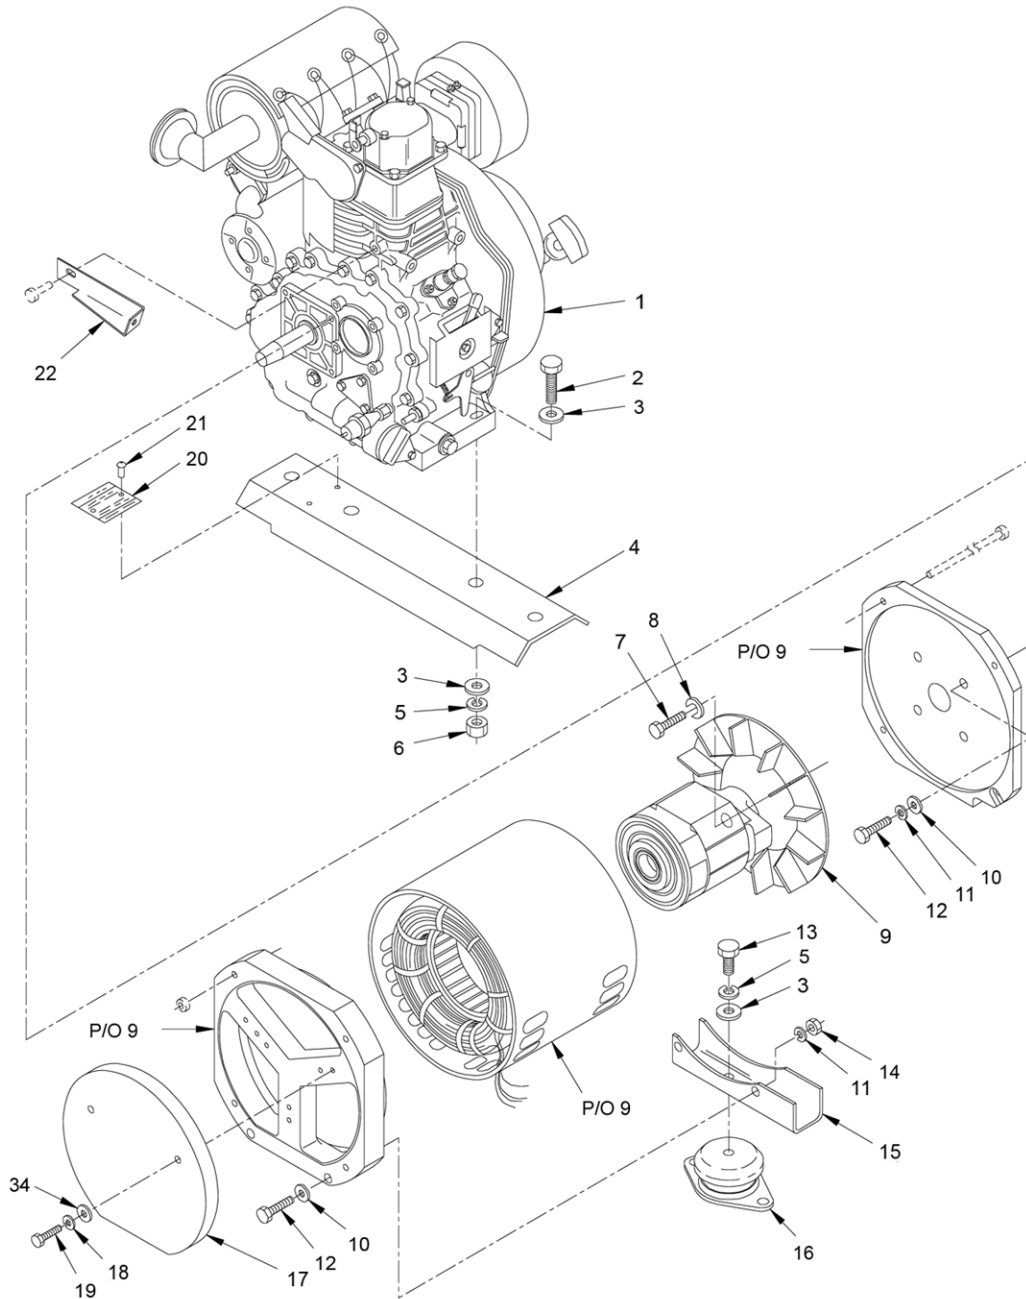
Engine Alternator Assembly (MEP-531A) (Sheet 1 of 2).
